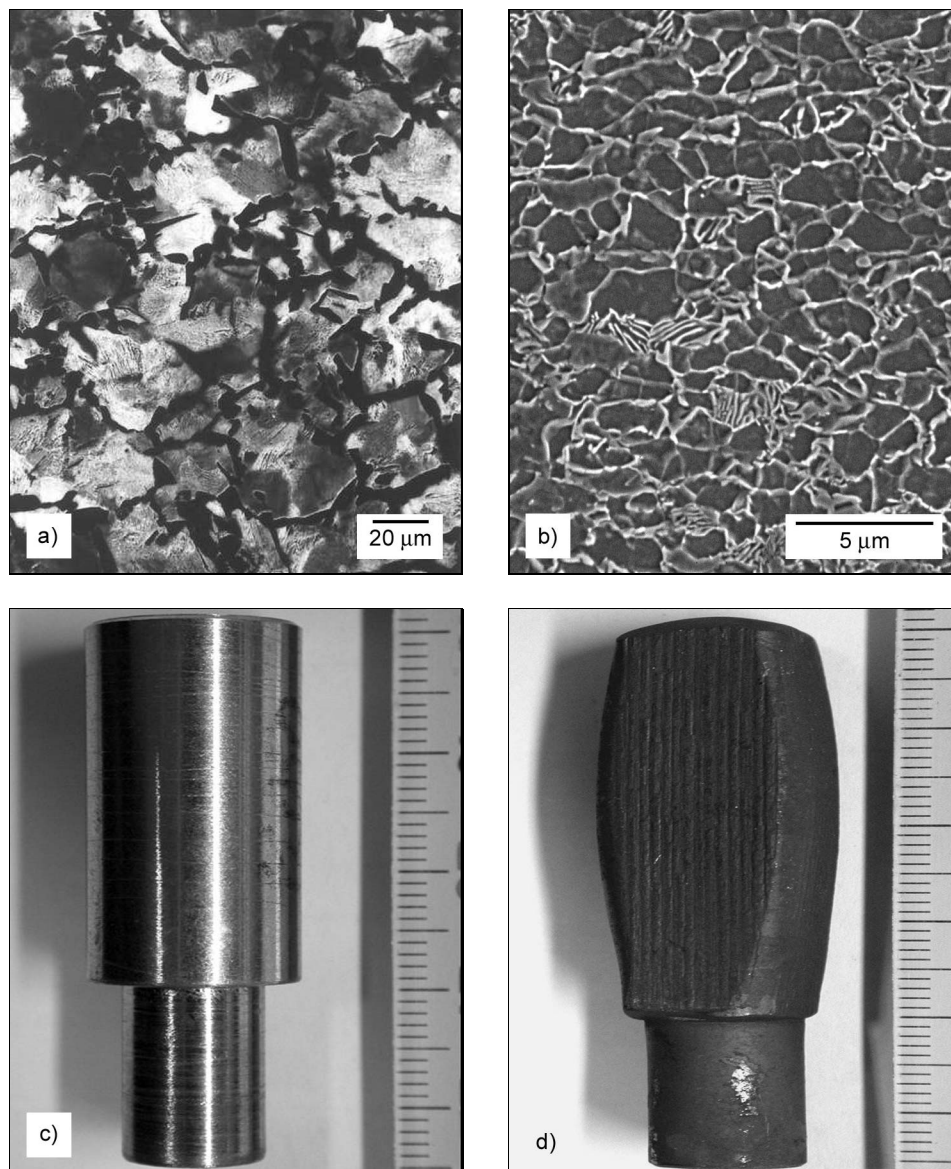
SEM micrographs of ferrite-pearlite structure of the as-received (a) and thermo-mechanically processed medium carbon steel (b). Design of workpiece for TM processing (c) and shaped workpiece (d).
